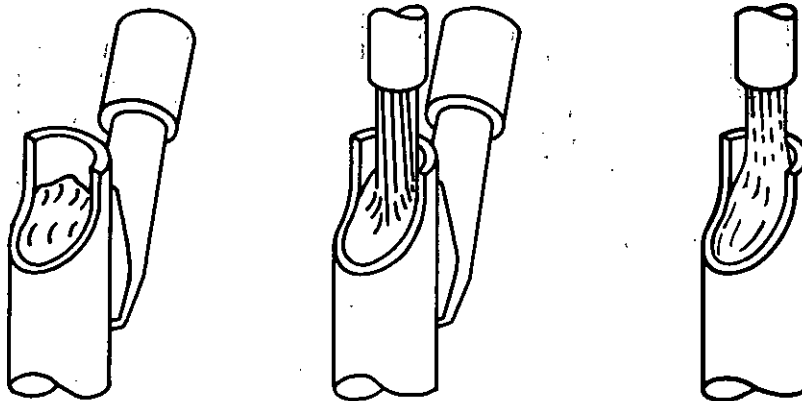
Soldering of hollow cylindrical connections (see 5.1.8).
